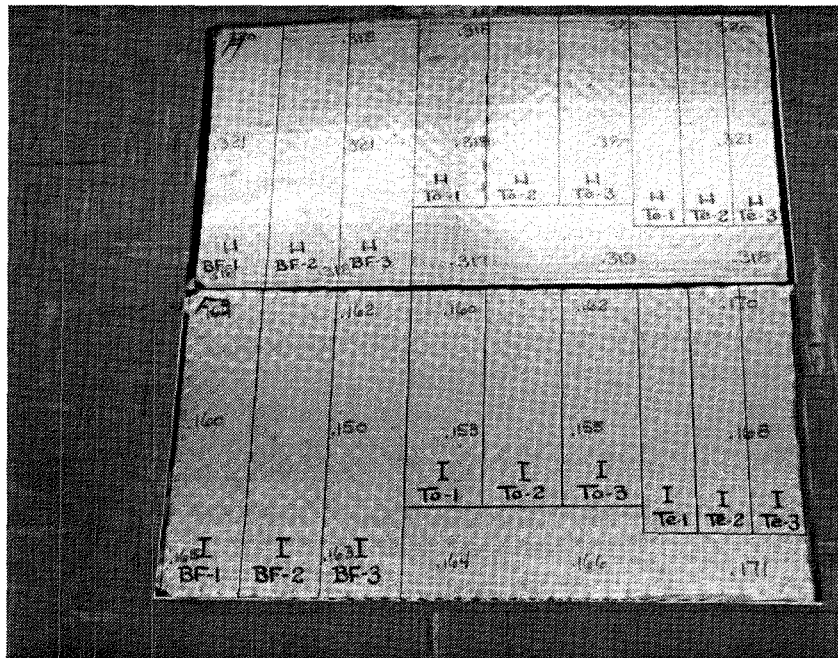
Panels H and I Showing Thickness and Specimen Layout
